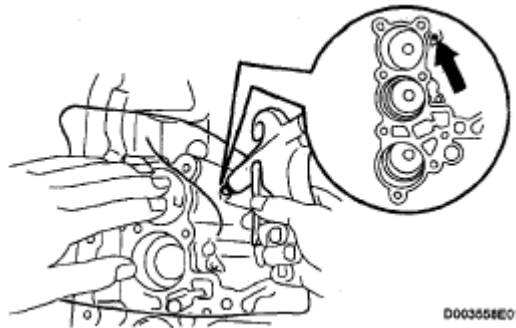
Locating Reverse Clutch Accumulator Piston O-Rings
